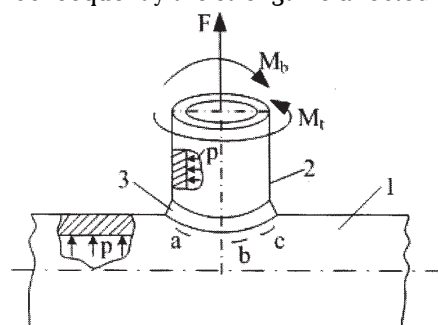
Tubular junction: 1 - run pipe; 2 - branch pipe; 3 - weld; a, b, c - cracks
